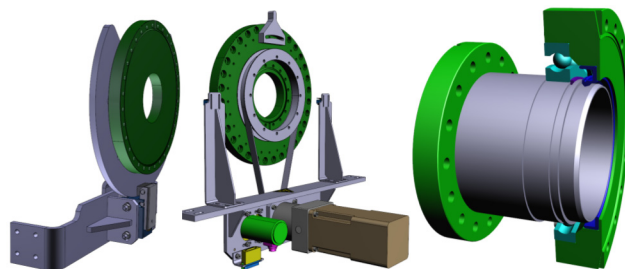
Technical drawing of the disc brake, motor unit and rotation flanges (left to right).
